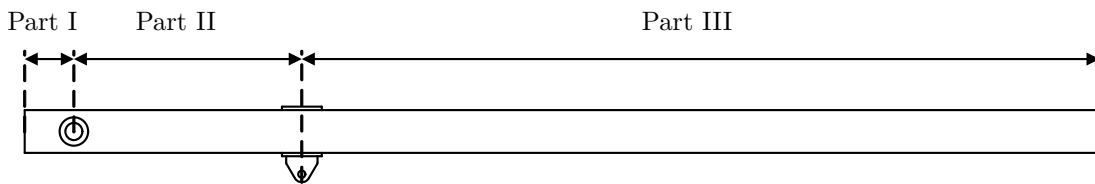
Main parts of the beam - Part I is the part prior to the main joint, part II is the part between the main joint and the upper cylinder mount, and part III is the part from the upper cylinder mount to the end of the beam.
